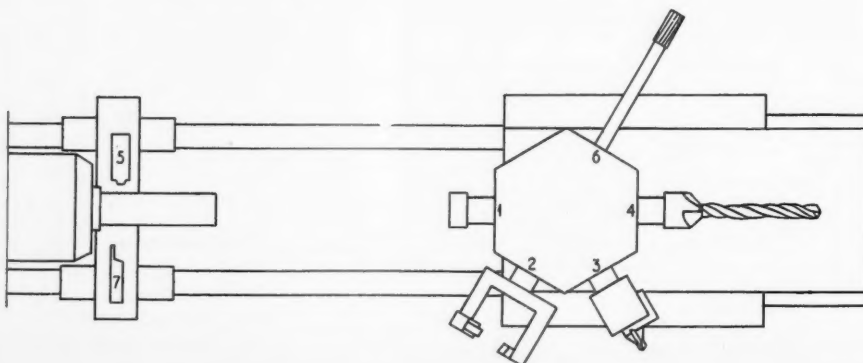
The tooling layout for producing the component shown detailed in Fig. 8
